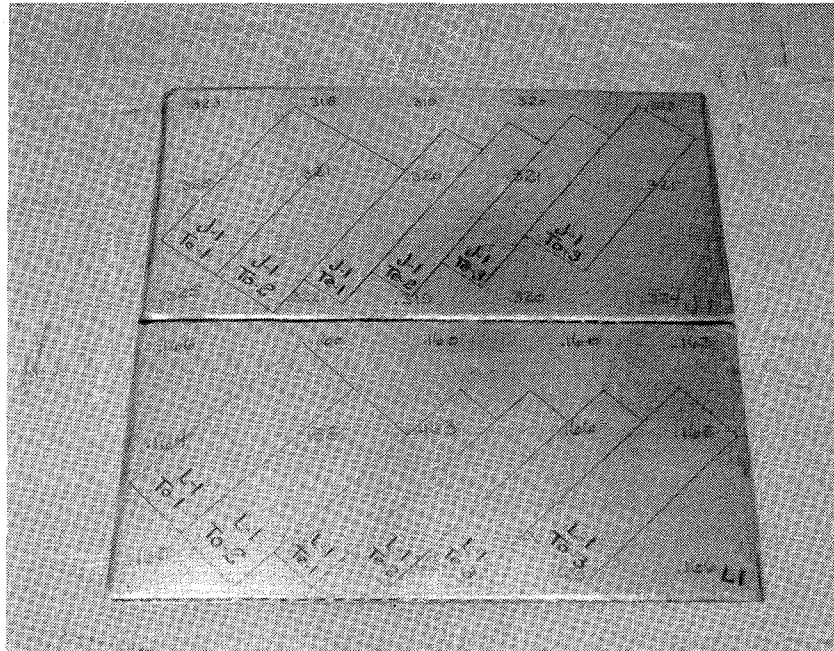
Panels J1 and L1 Showing Thickness and Specimen Layout
